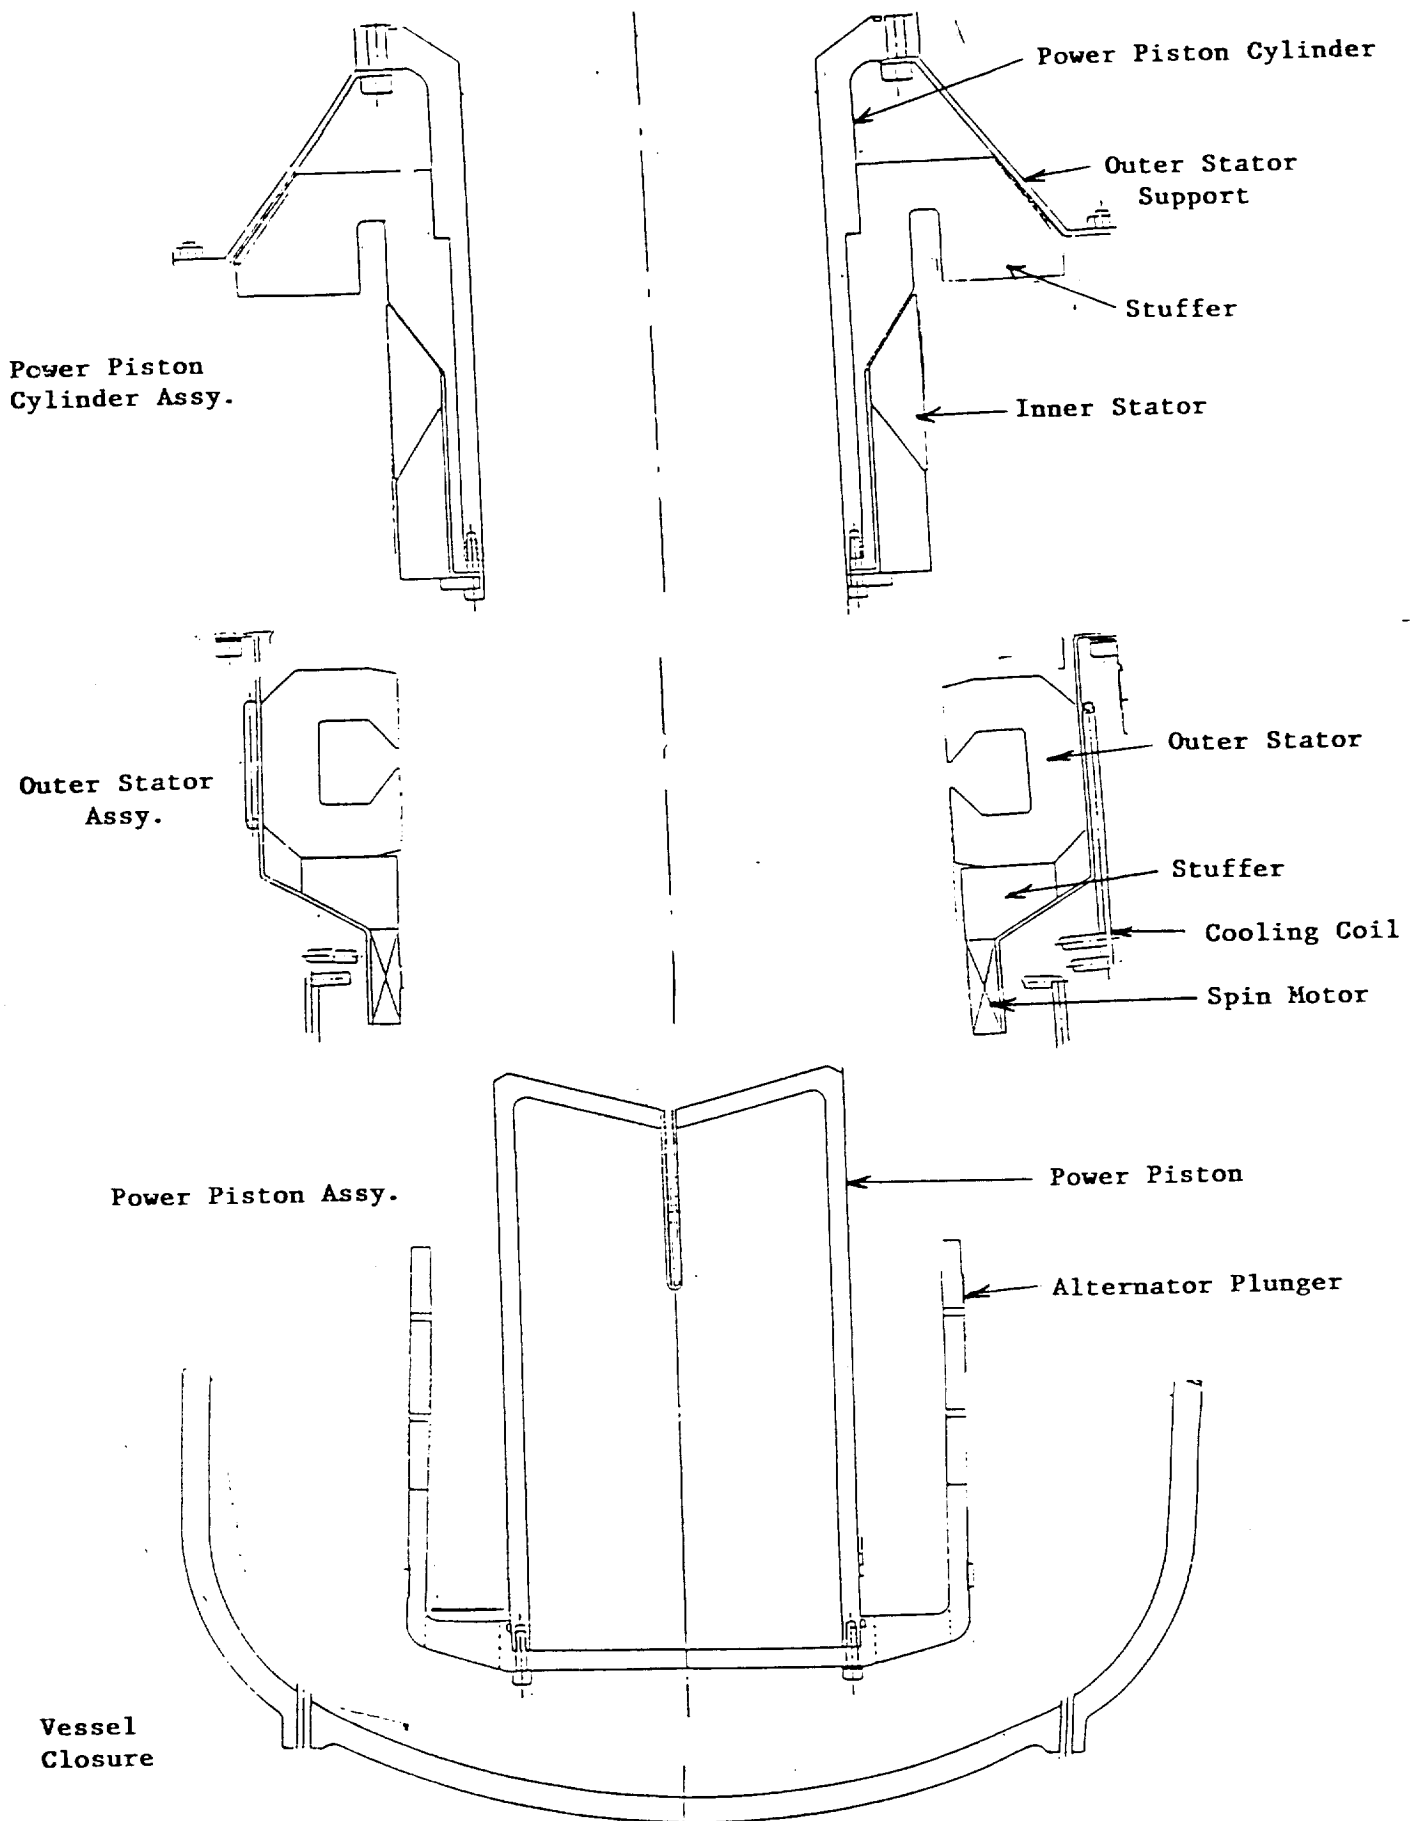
Power Piston, Power Piston Cylinder and Outer Stator Assemblies
